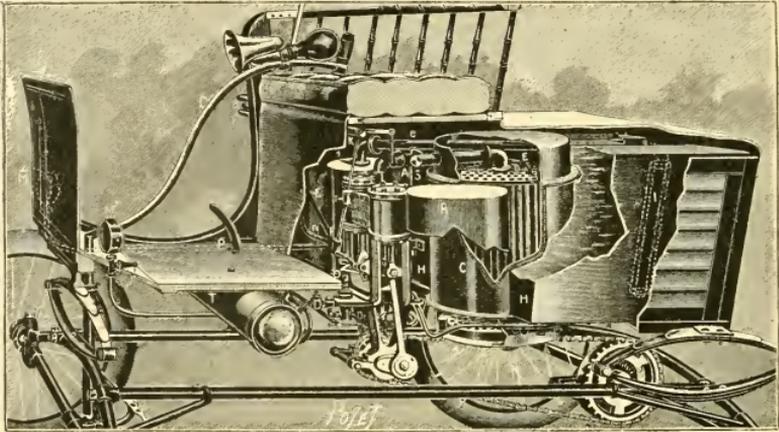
SECTIONAL VIEW OF FIG. 14, SHOWING LOCATION OF ENGINE, BOILER AND OTHER DETAILS.
